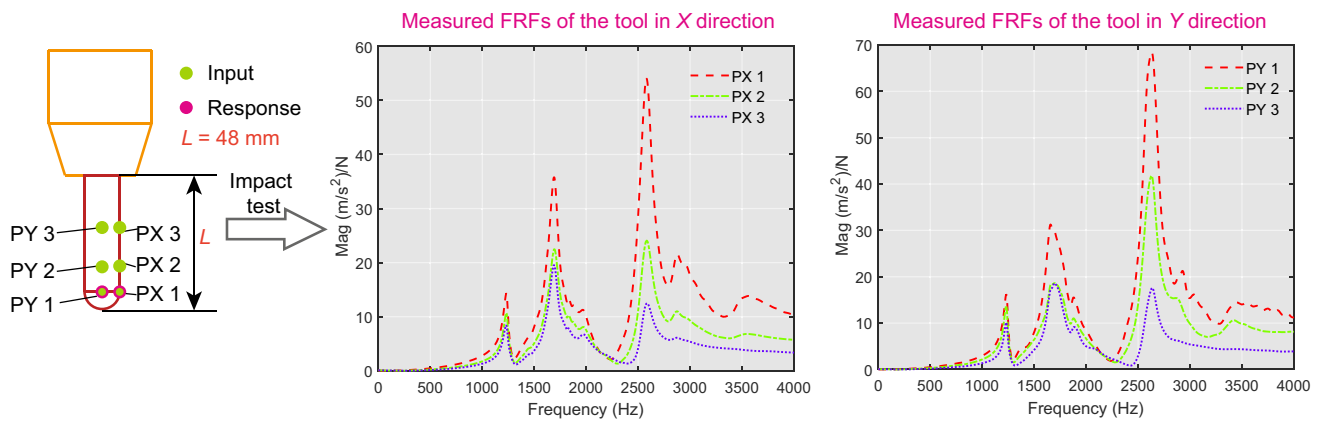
Measurement points of impact tests and measured FRFs of tool
